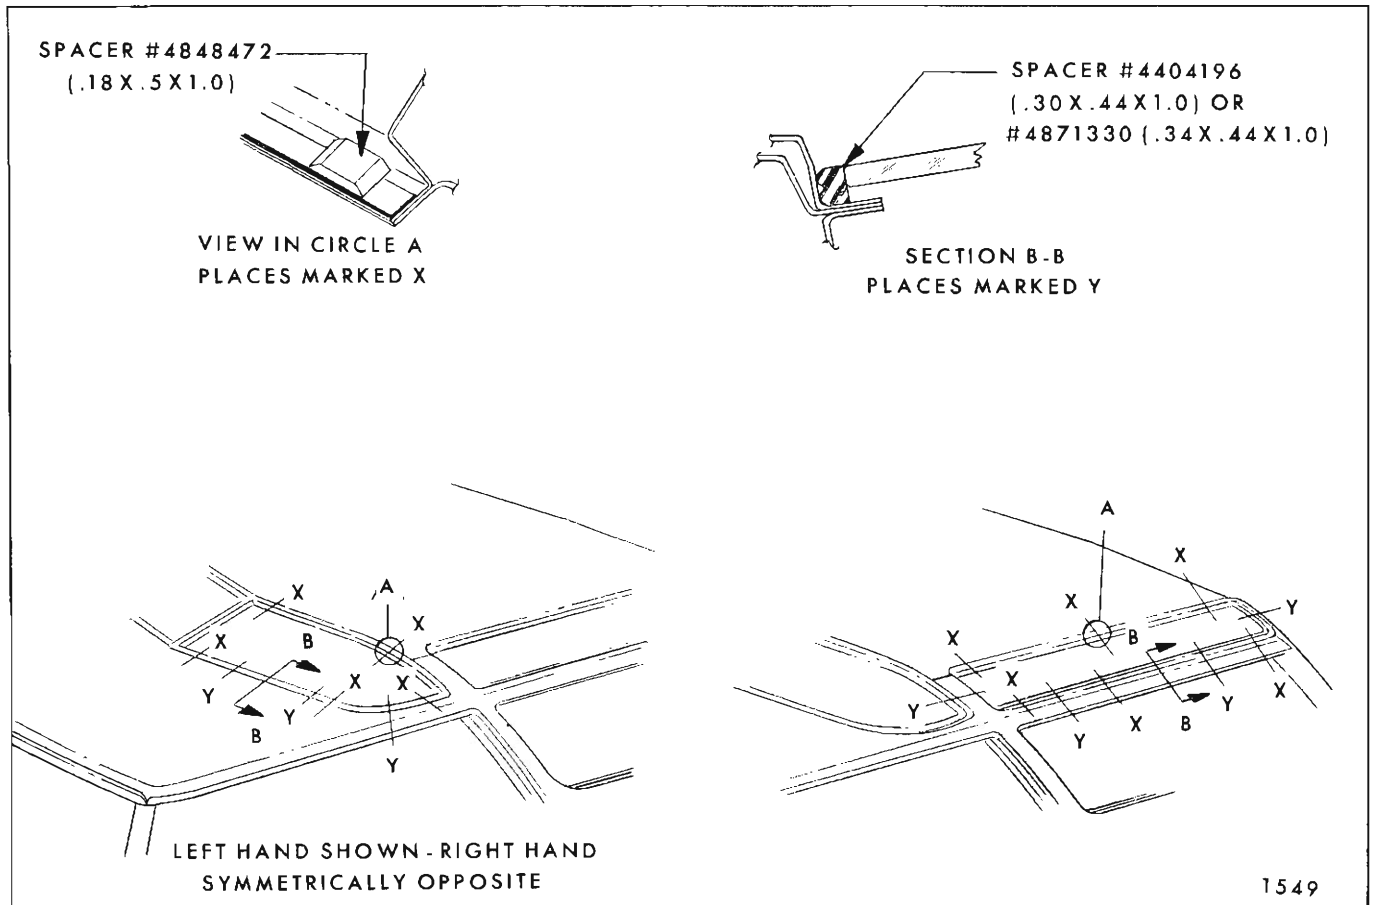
E18—Front and Side Skylight Rubber Spacer Installation
